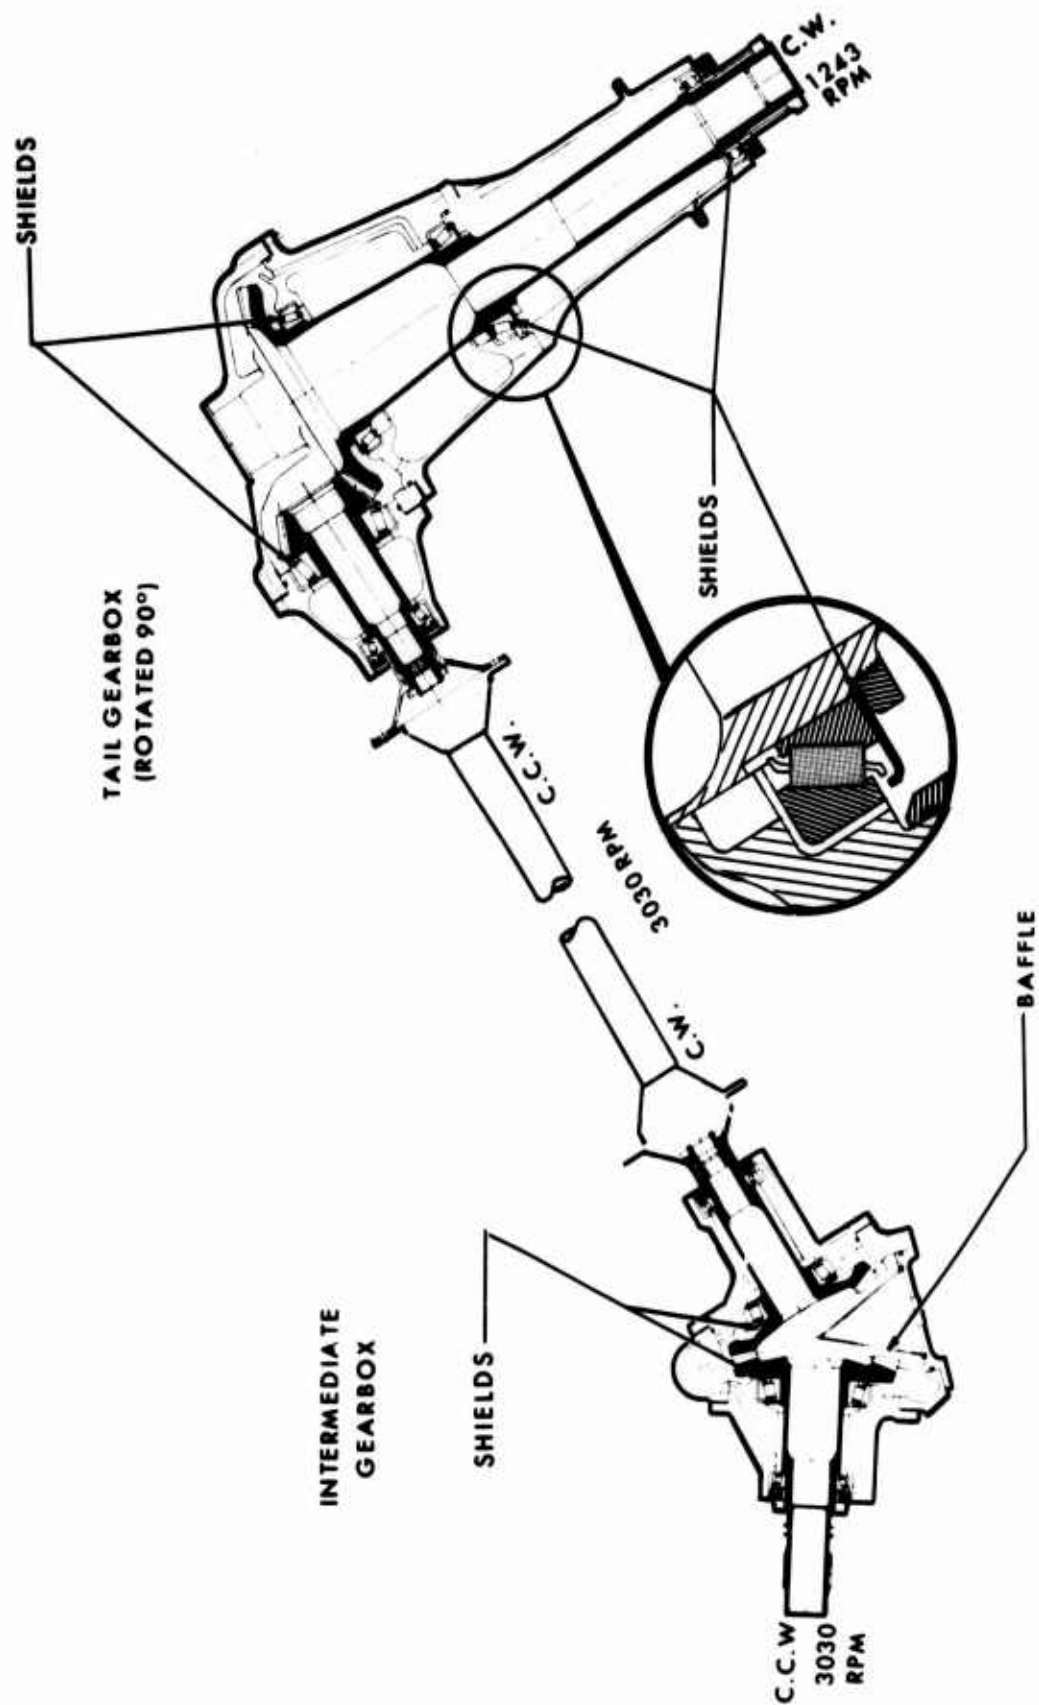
Cross-Sectional Views of Modified H-3 Intermediate and Tail Gearboxes.
